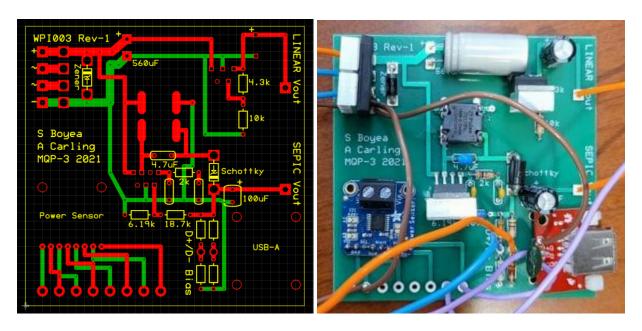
Custom PCB Layout and assembled prototype (missing I2C connectors)
